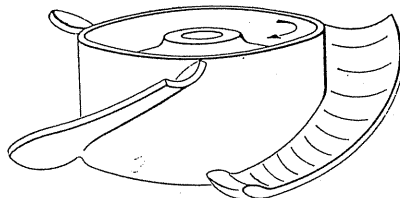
Wear-resistant blade of the fan impeller as shown in Fig. 425 Pat. Reg.
